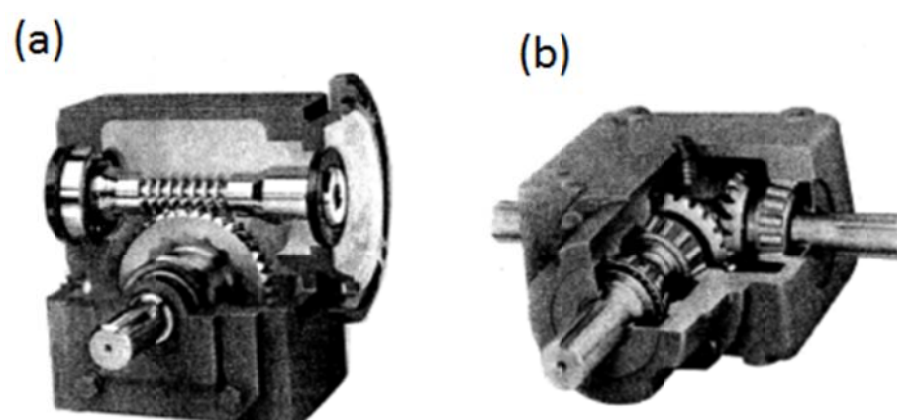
(a) Worm Gearbox (b) Bevel Gearbox
